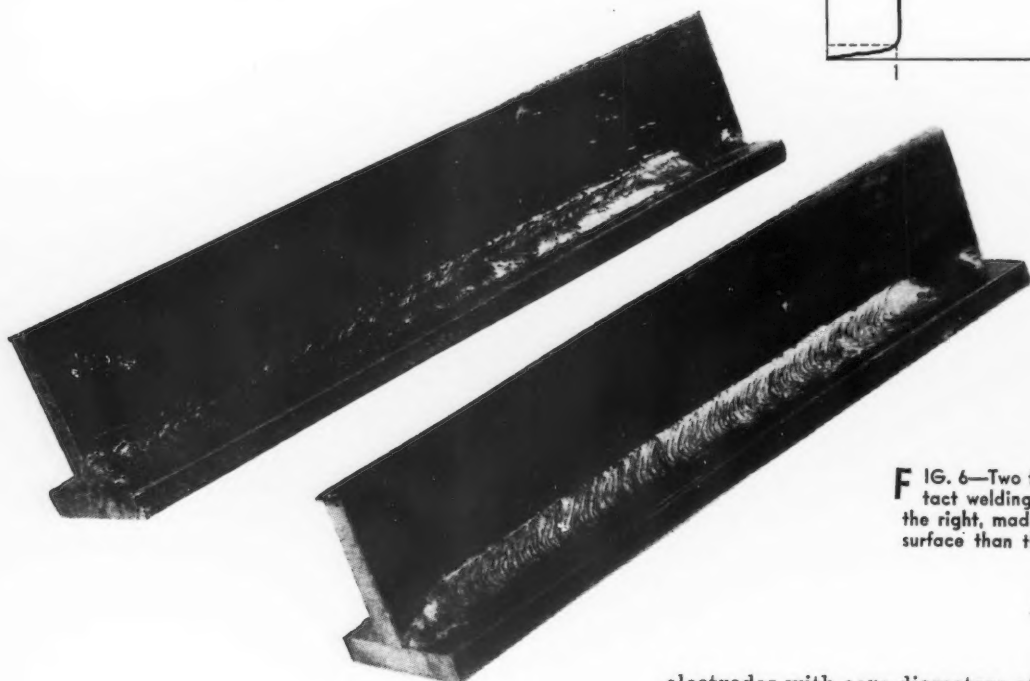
Two fillet welds made with contact welding in a flat plane. That on the right, made with dc, has a smoother surface than the one on the left, made with ac.
